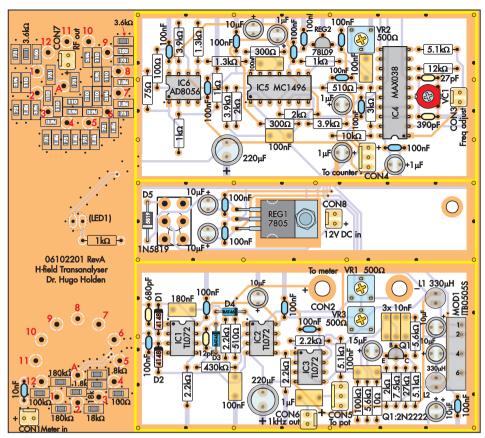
most, but not all components are mounted on this double-sided PCB. It has extensive ground planes, but shielding plates are still required between the three major sections where shown. They are supported by, and soldered to, numerous PC stakes. The major off-board components are potentiometers VR4-VR6 and the power and signal input/output connectors, all of which connect via locking headers.
